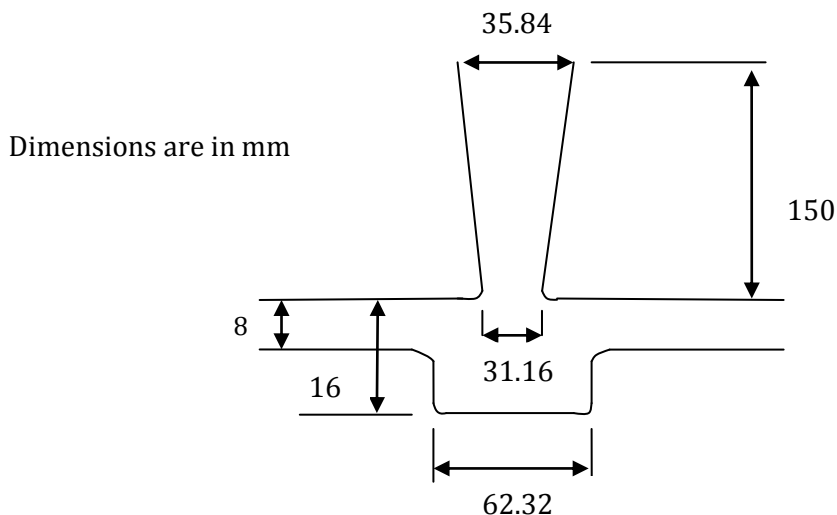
Dimension of Sprue, Sprue well and two gates in mm for gating ratio 4:1
